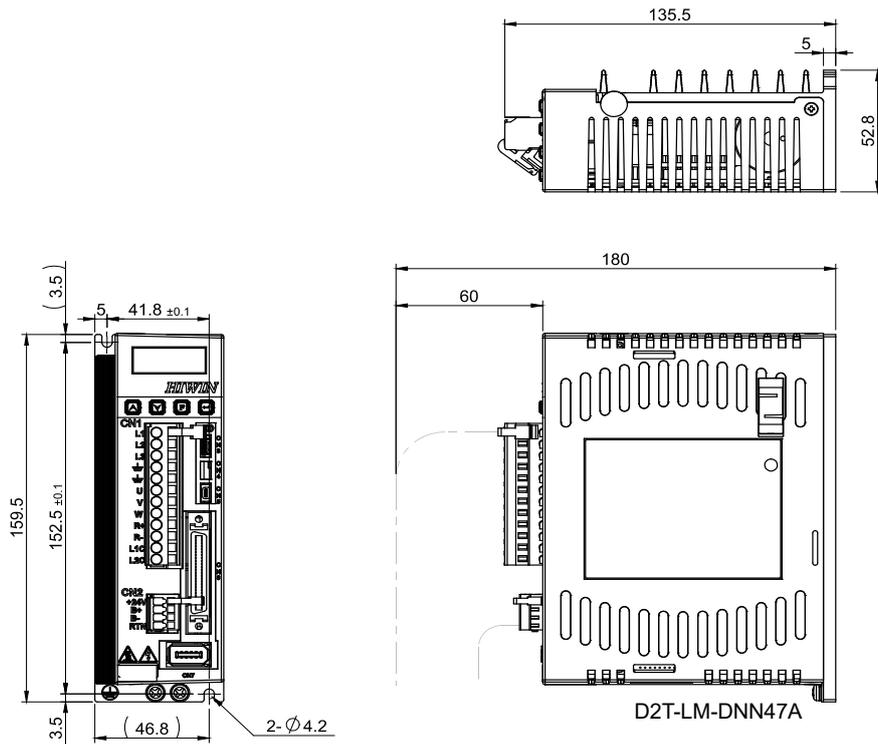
Dimensions of D2T-LM Frame B (Standard)
